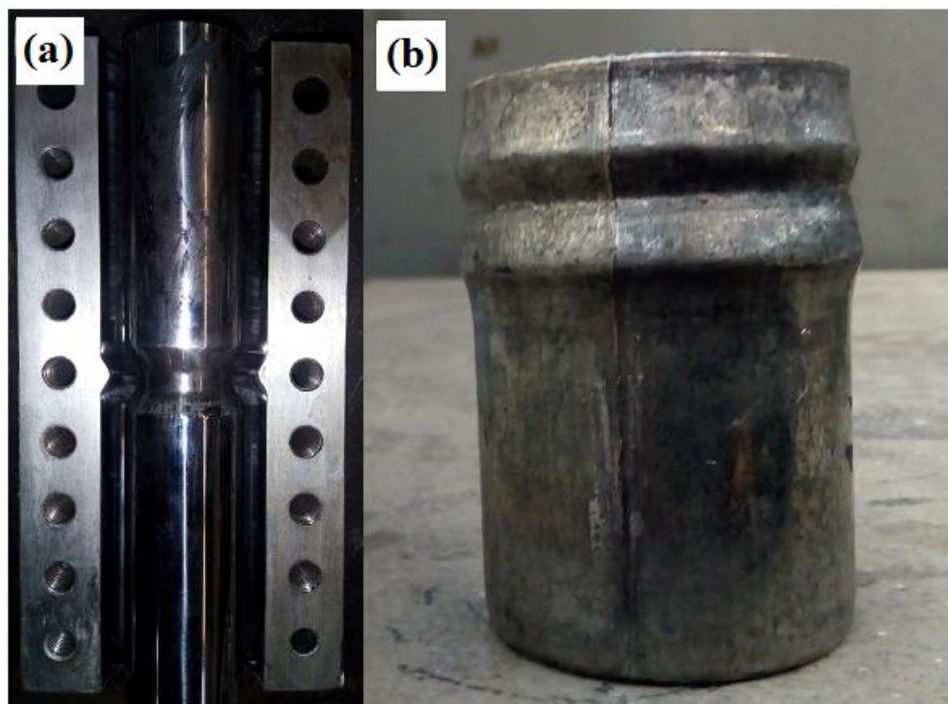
(a) Manufactured TCP die. (b) A specimen processed using the manufactured die.
